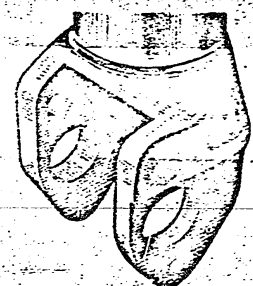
LOWER PART OF MAIN L.G. STRUT POWER
